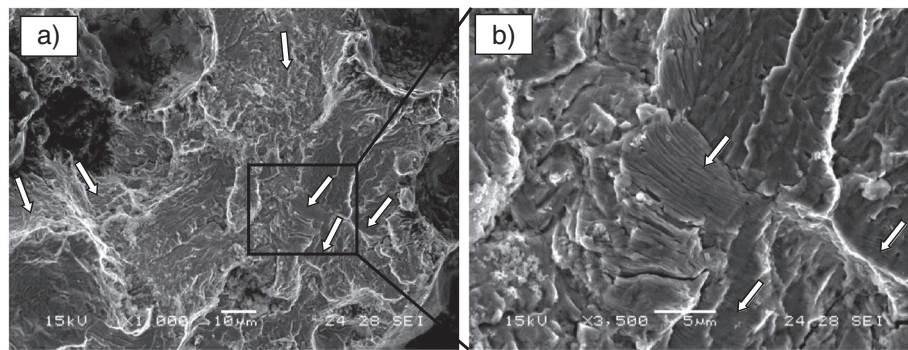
Fracture surfaces of the specimens broken under the high-cycle fatigue regime. Small regions showing striation marks.
